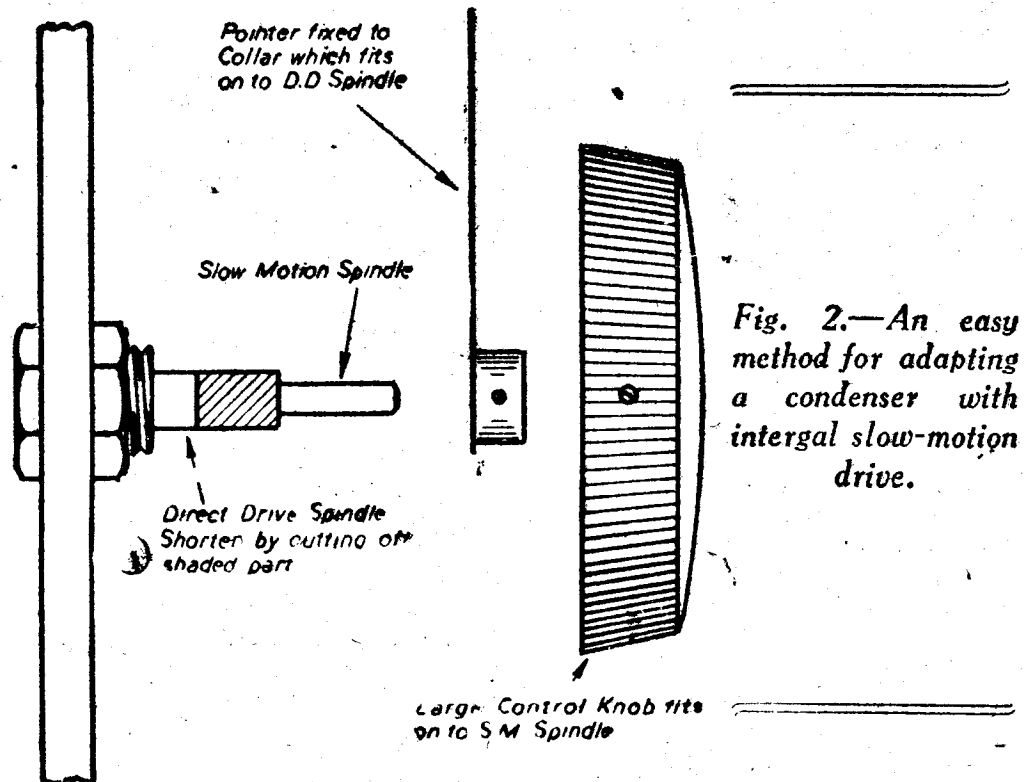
An easy method for adapting a condenser with integral slow-motion drive.
